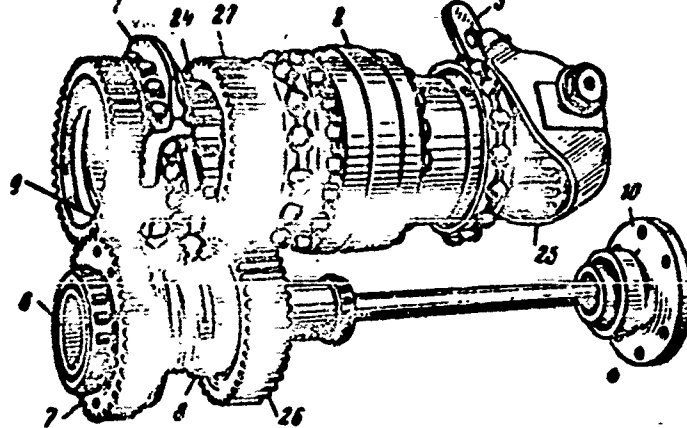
Hydromechanical clutch (housing removed). 24 and 25) Pistons of hydraulic motor and hydraulic pump; 26 and 27) drive gears.
